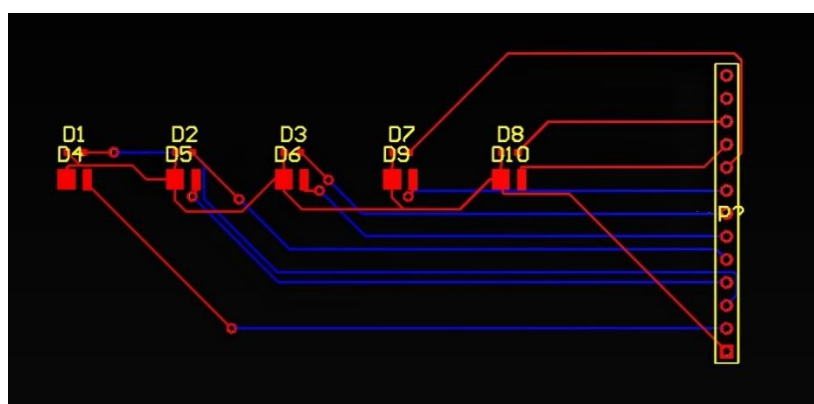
LED PCB placement (red – top level, blue – bottom level).
